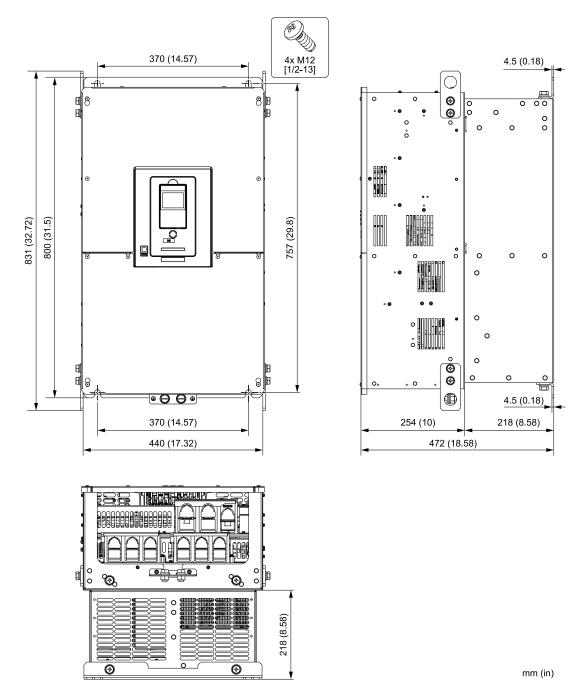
Exterior and Mounting Dimensions Diagram 2
